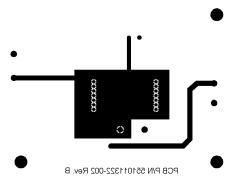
Recommended NGN PC Board Layout: Bottom-Side Layout
